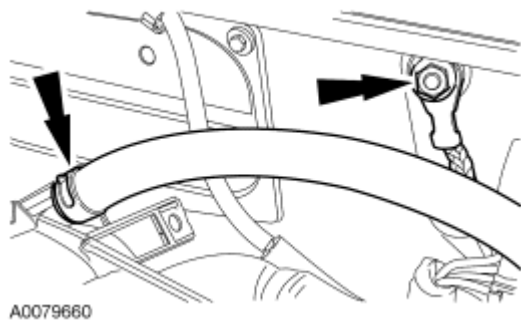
Locating Power Steering Pressure (PSP) Switch Electrical Connector
